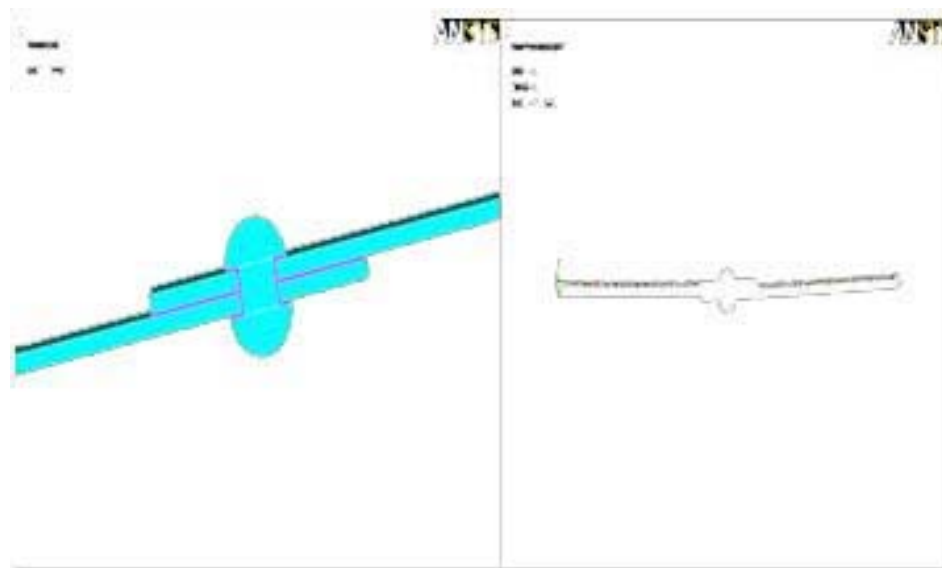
(a): The model of a single lap riveted joint with adhesive b/w the plates, rivet and head also.
